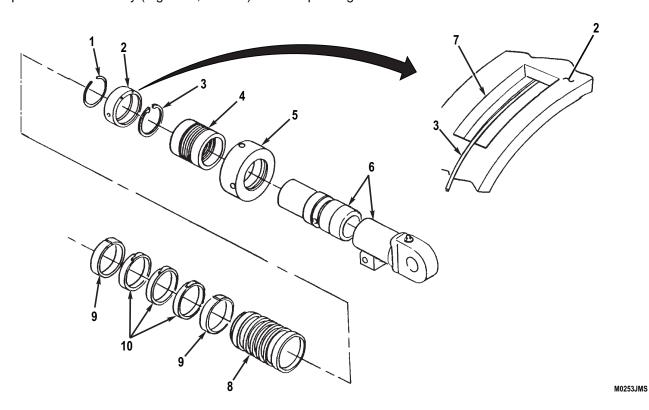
Hydraulic Lift Cylinder (with Side Lift Kit) Piston Tube Disassembly.
